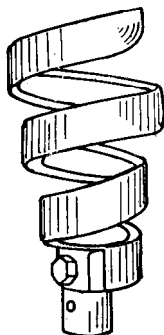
TYPICAL SKETCH OF AUGER TYPE ROOT CUTTER
